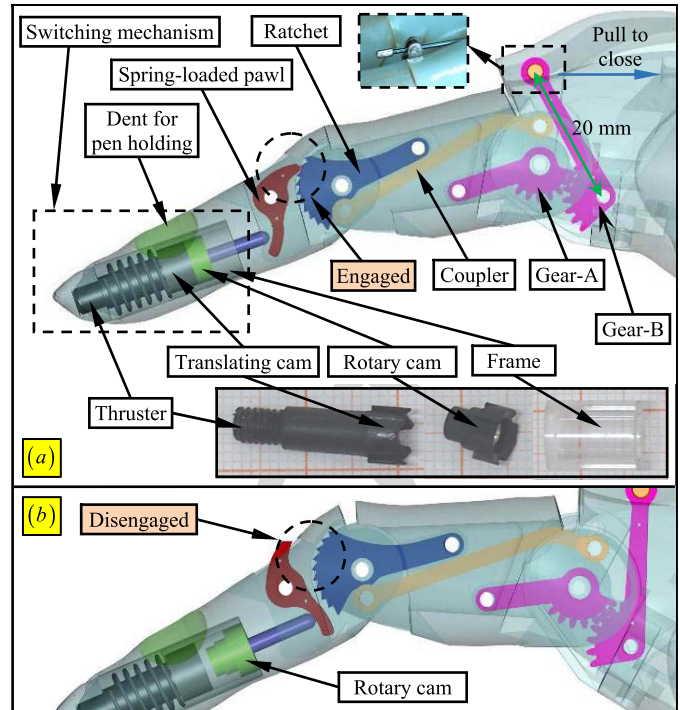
The disengageable ratchet and the gear pair for force magnification: the ratchet (a) engaged and (b) disengaged.
